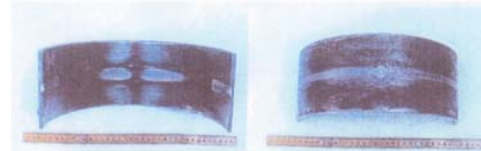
(a) shows a general view of crank pin metal of an engine with the conventional LO system. There is much sludge not only on the lubricating surface but also on the back. The enlarged view of the metal in Fig.8(b) shows that there are many sludge particles on the LO path and there are some scratches on the lubricating surface.
